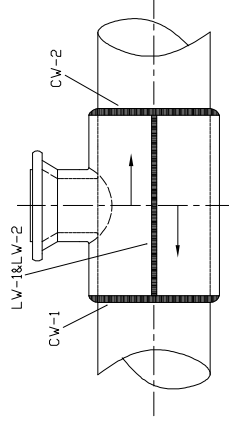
Encirclement Split Tee fitting Welding sequence
